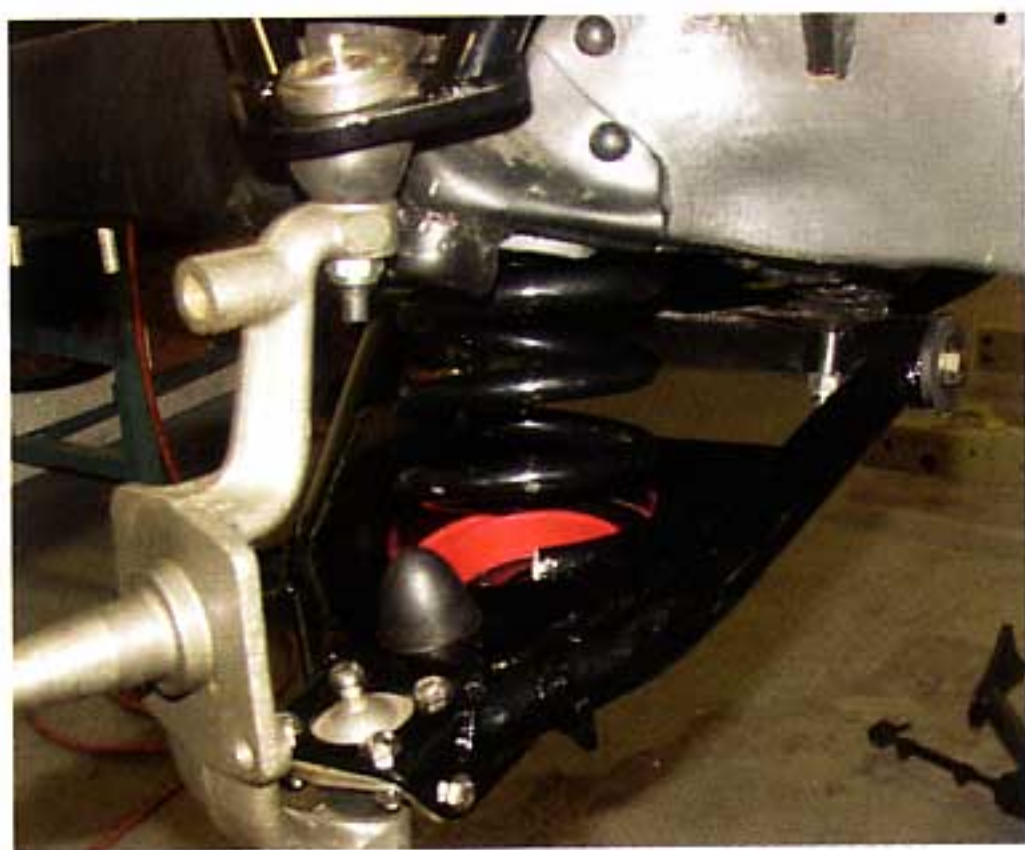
Once both ball joints are attached to the spindle, the coil spring compressor can be removed by passing it down through the hole in the lower control arm.
